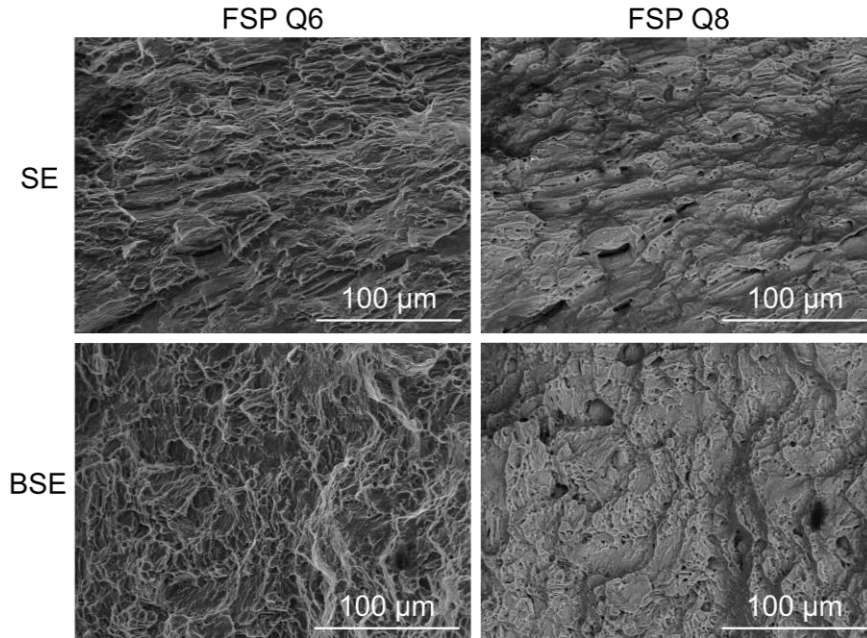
Analysis of the fracture surfaces of FSP Q6 and Q8 after tensile tests.
